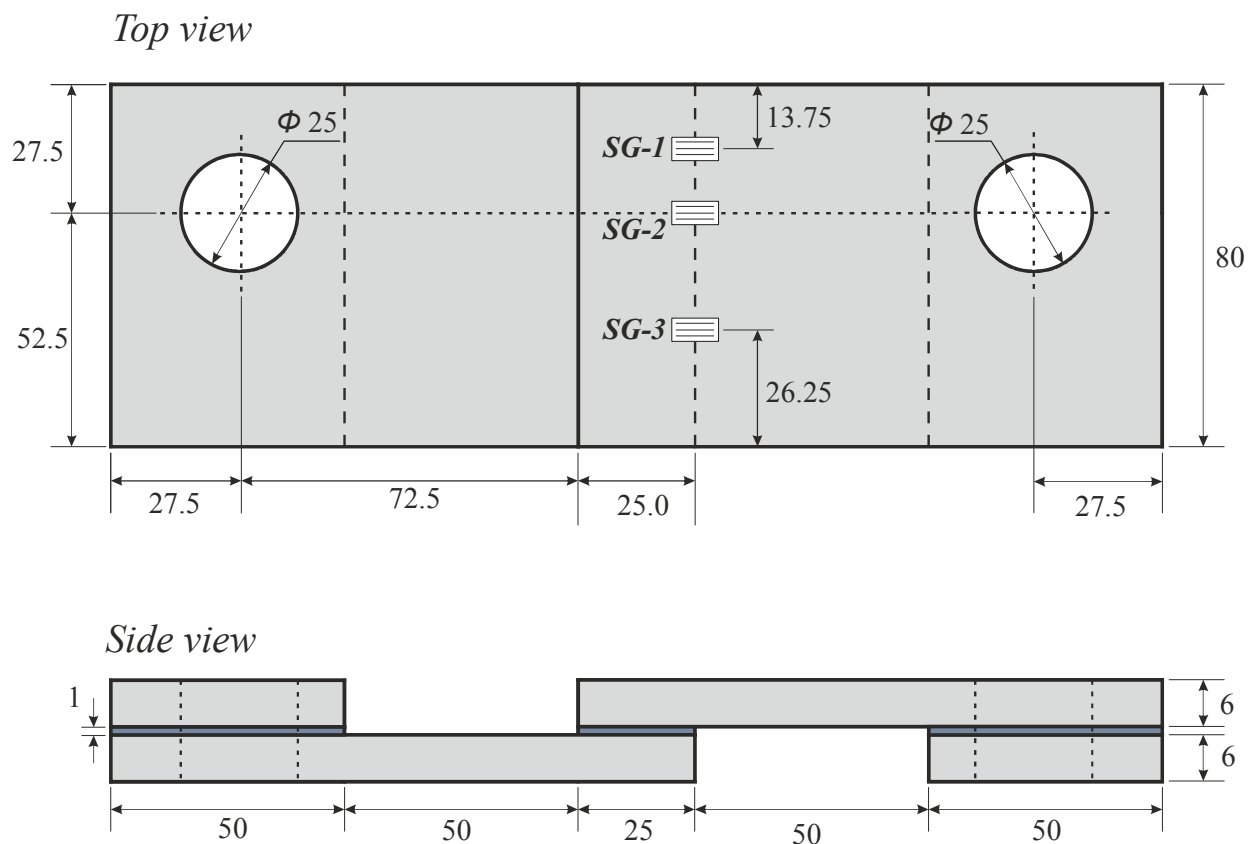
Geometry with nominal dimensions of the fabricated SLJ-EL specimens.
